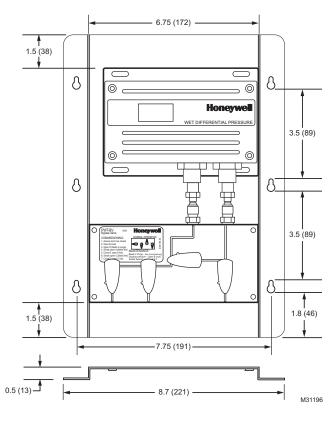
Dimensional drawing of PWT-BV Bypass Valve Manifold showing PWT Sensor (not included) for reference only.
